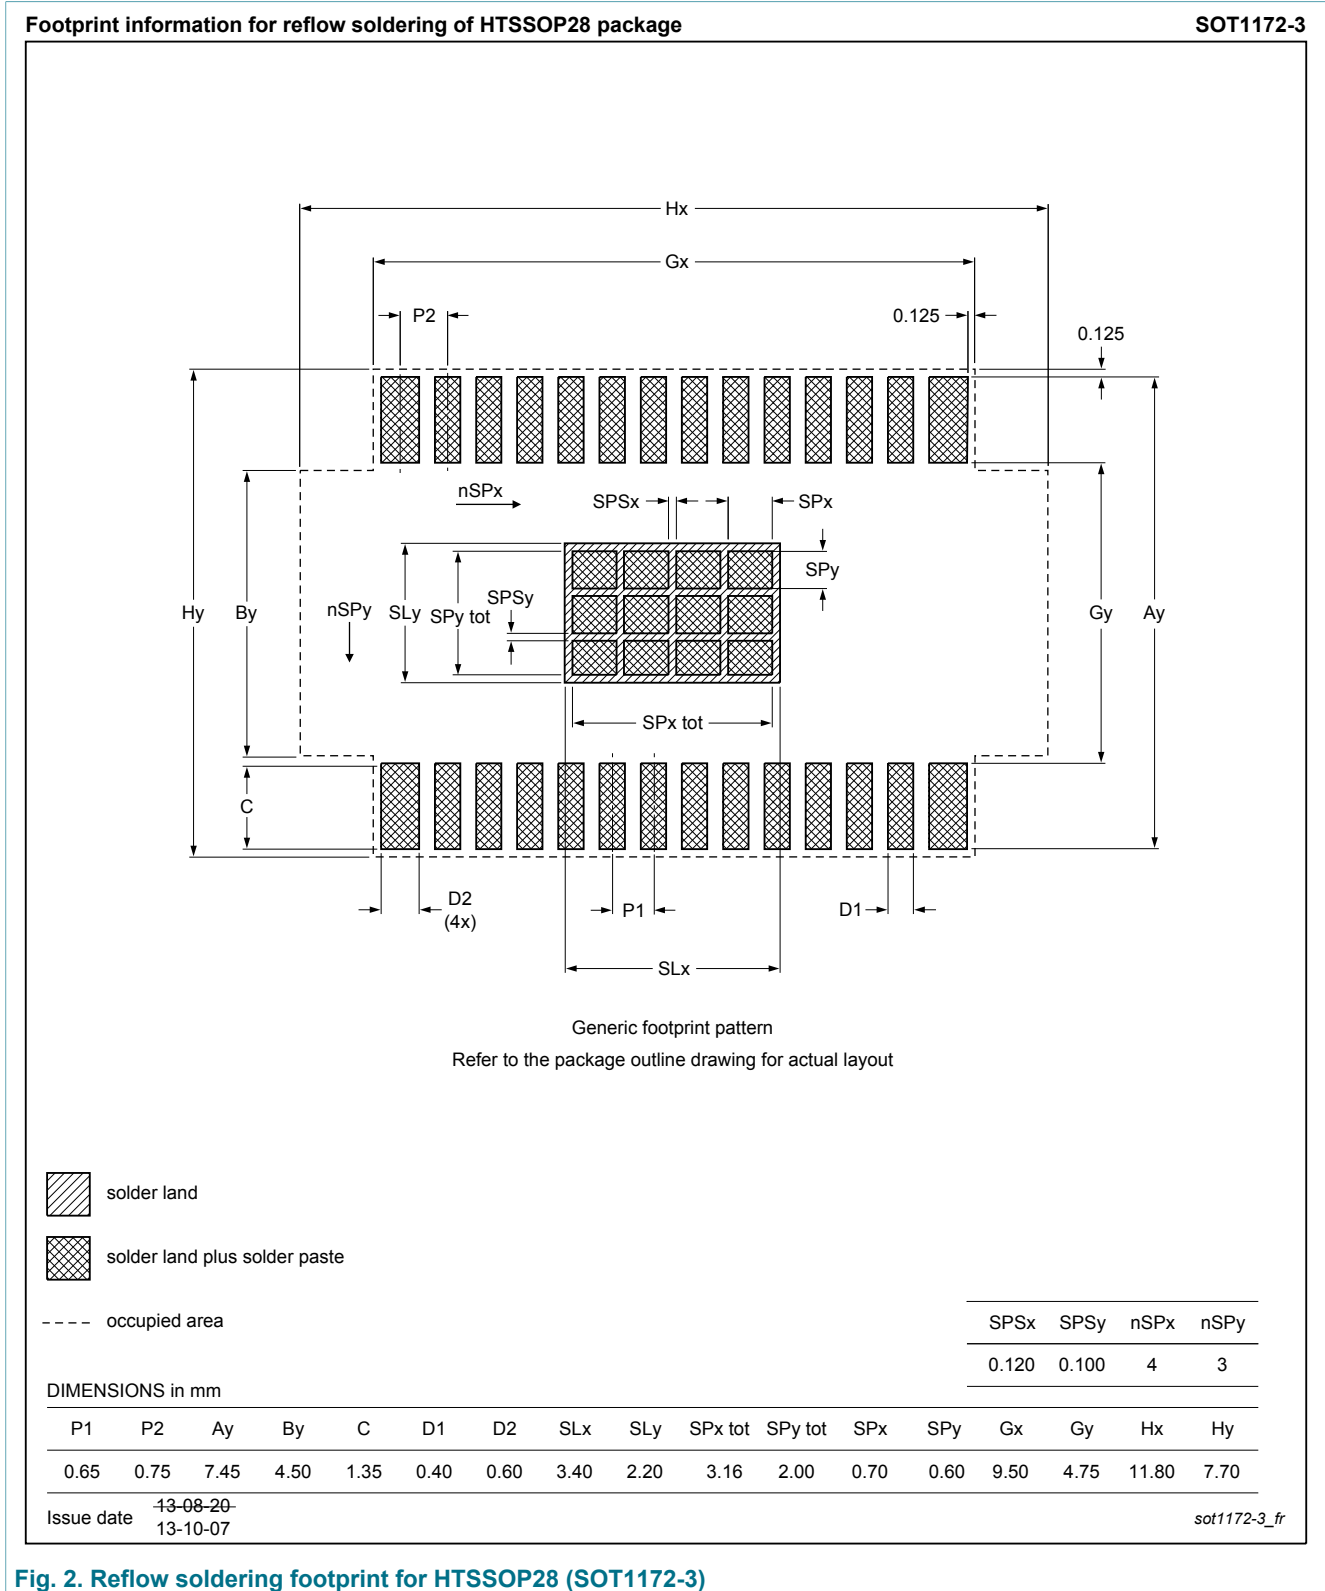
Reflow soldering footprint for HTSSOP28 (SOT1172-3)
